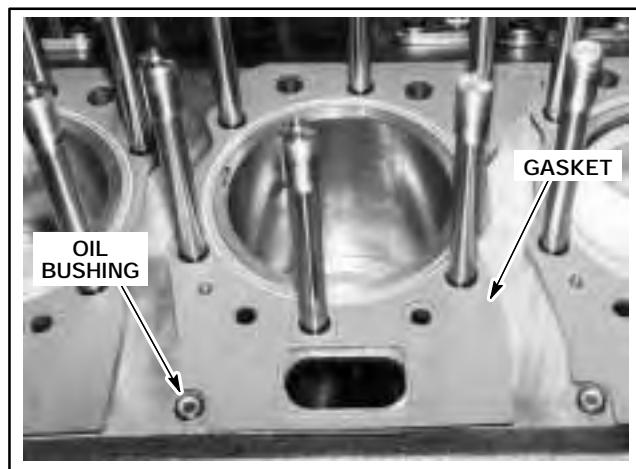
Cylinder Head Gasket - P/N 300000B
